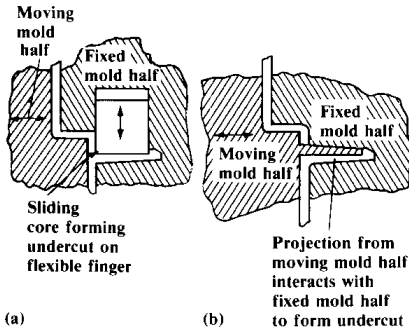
(left) (a) Arrangement for Molding an Undercut on the End of a Flexible Finger Using a Sliding Core; (b) With the Undercut Formed by a Mold Projection, the Sliding Core is Eliminated.
